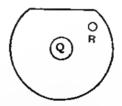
Door Fastener for Bull's-eye Lantern.
